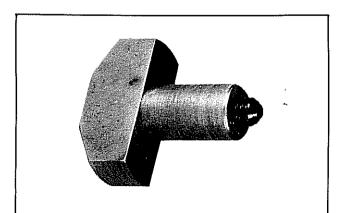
Transfer Cam, removed. The adjustment screw is to the right. The Cam can be adjusted while in the Top Plate by inserting the Hex Key Wrench through the small hole in the face.
